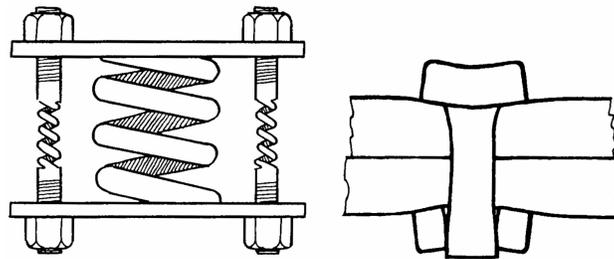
Illustration of distortions developed by clamping. Components represented by heavy spring during bolting being compressed by a group of small springs (bolts). Distortion of the solid spring (components) is shown greatly exaggerated on the right.⁶⁷
